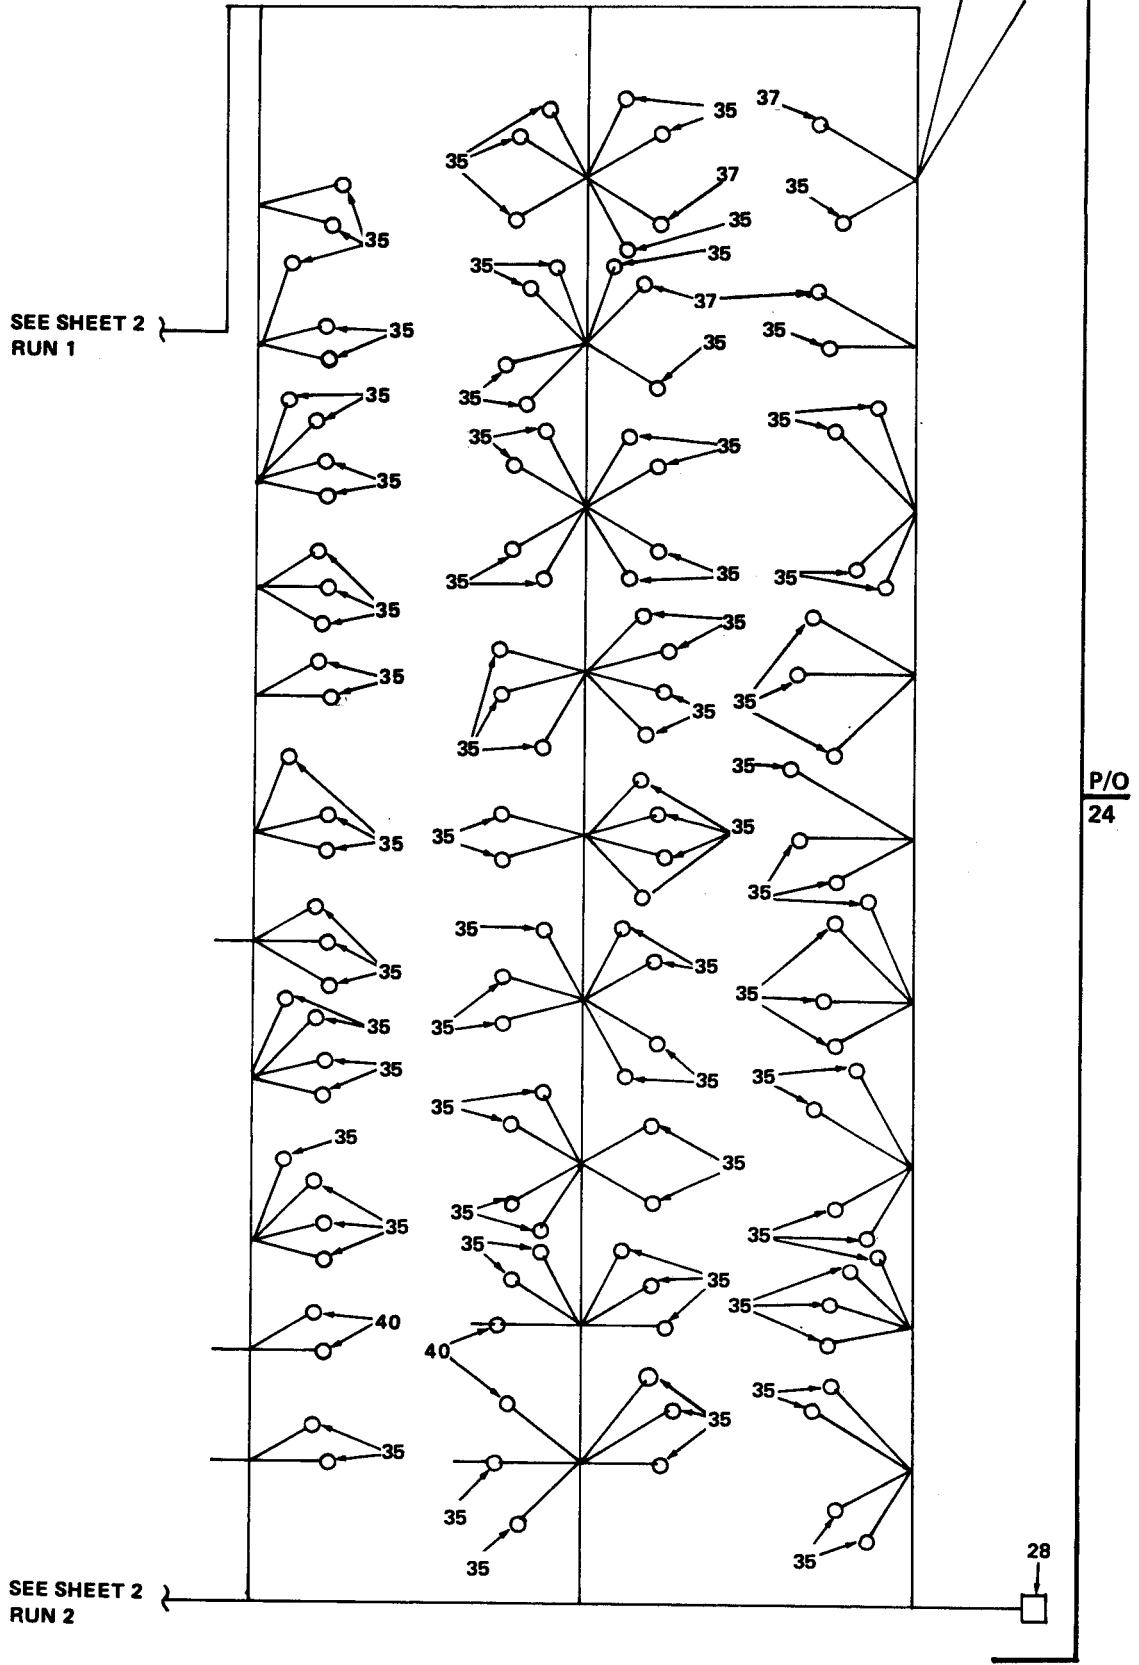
Special Relay Assembly (Sheet 3 of 3)
